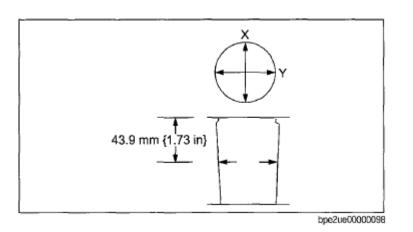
Identifying Cylinder Bore Diameter Measurements Positions
